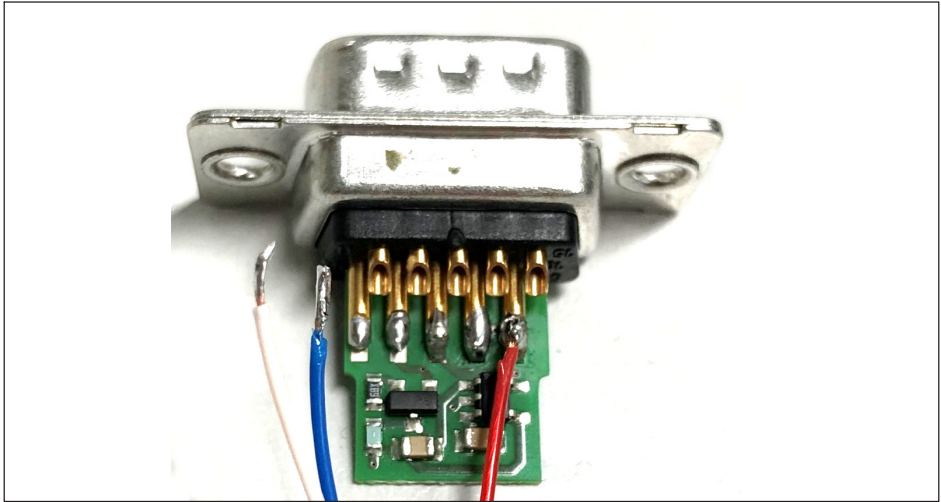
View of the TEDS module in the plug from below; pin 10 soldered on.
